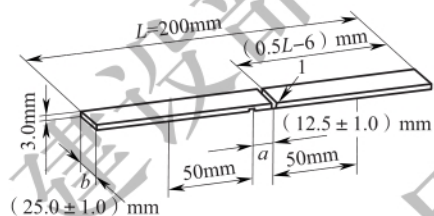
Interlaminar shear strength test specimen and dimensions
